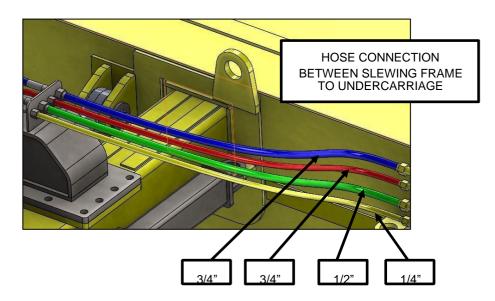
Hydraulic hose connections from the slewing frame to the pontoon
